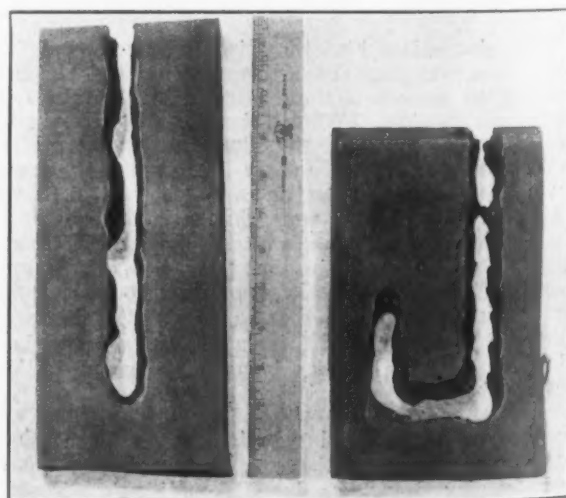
Sample Cuts in (Left) Cast Iron 1½ In. Thick at 16½ Ft. per Hr. and (Right) Steel 1 In. Thick at 21½ Ft. per Hr.
